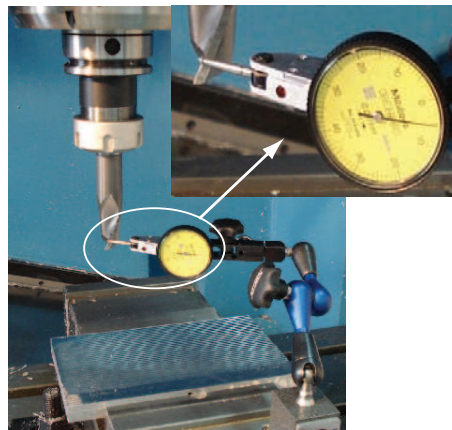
Assessment of the radial runout of the cutter edges. The cutting tool diameter is 20 mm.
